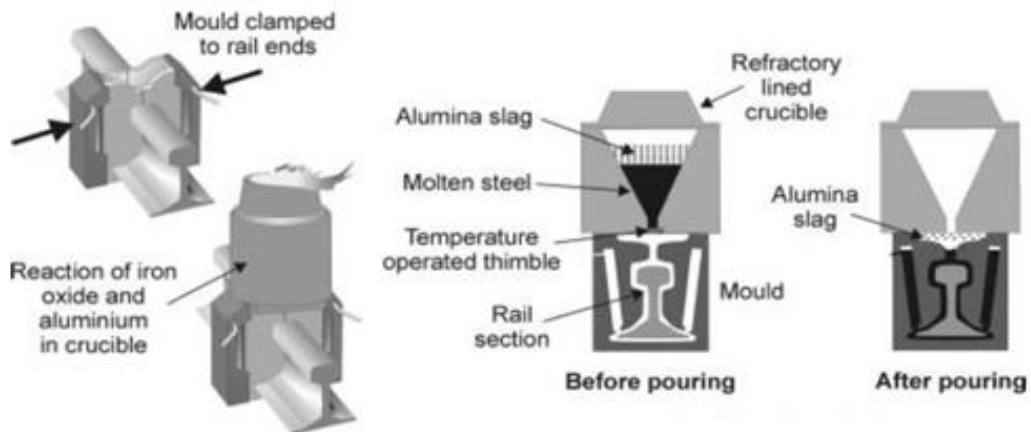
Illustrative view of Thermite welding (Reference [2])
